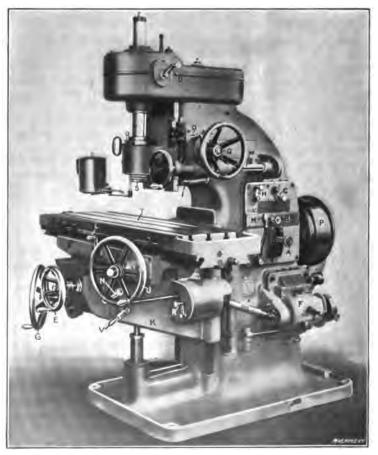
Brown & Sharpe Vertical-spindle Milling Machine
